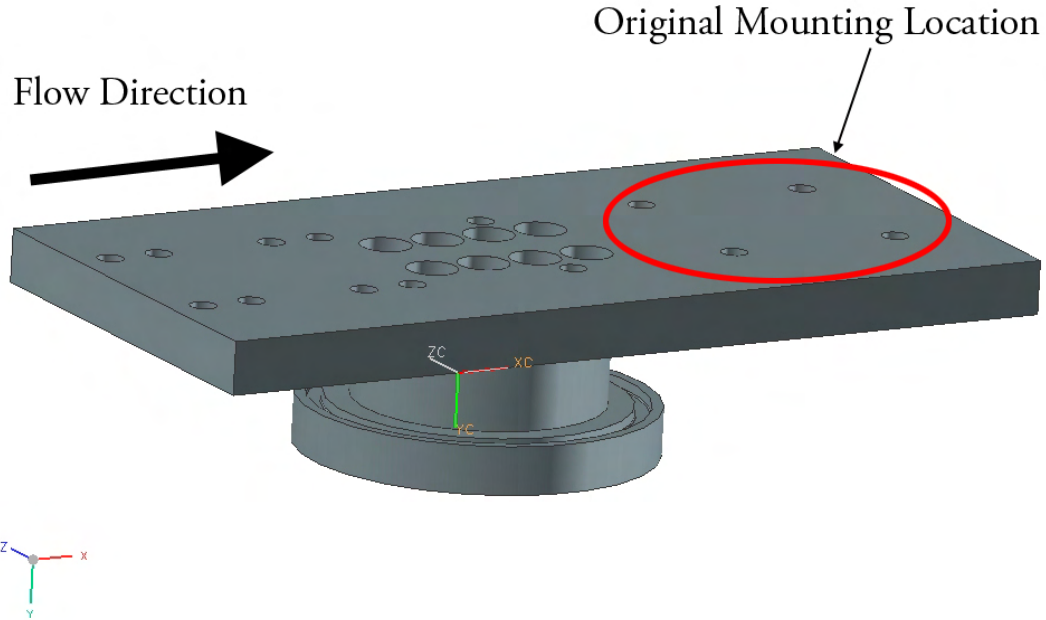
A three dimensional drawing of the new sting mounting. The original mounting location is labeled, along with flow direction.
